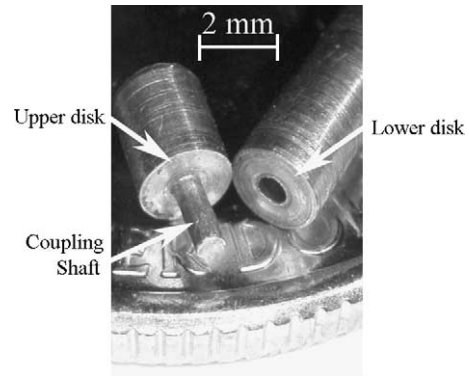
Double-disk pump shafts before assembly on a United States quarter dollar coin.
